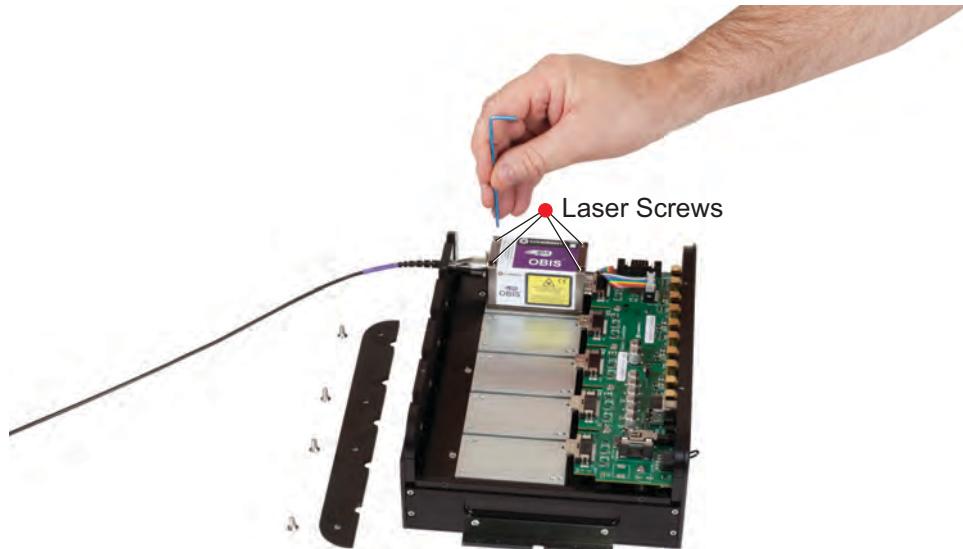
OBIS Laser Box Attaching the Laser to the Heatsink
